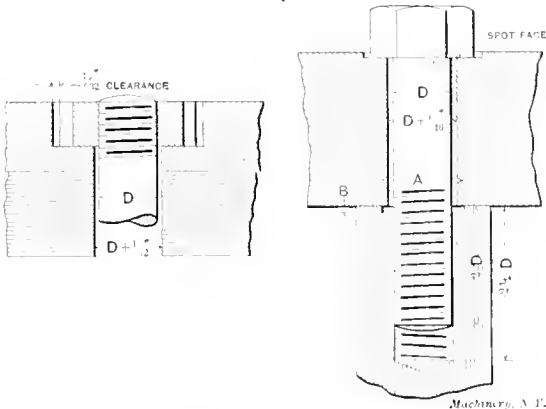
Steel Bolt for Rotating Field Pole Pieces.
